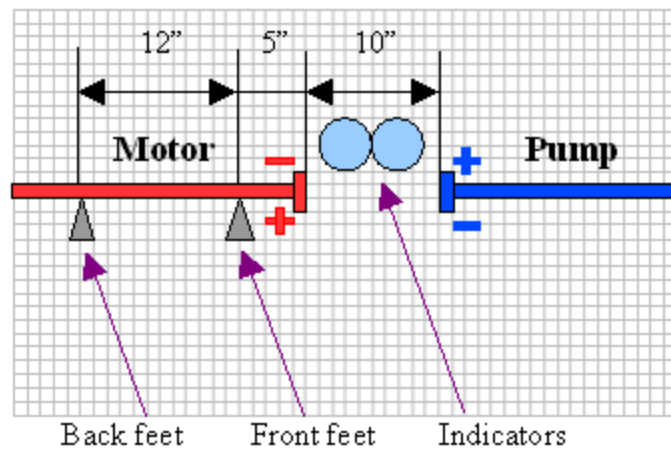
Figure D Schematic view of the pump-motor assembly with some measurements as an example.
